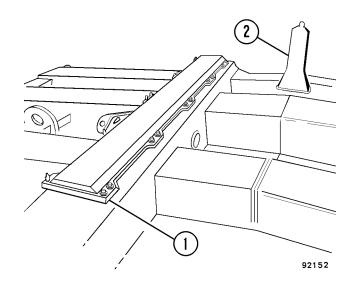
BODY PADS & GUIDE INSTALLATION 1. Body Pad Mount Plate 2. Body Guide
